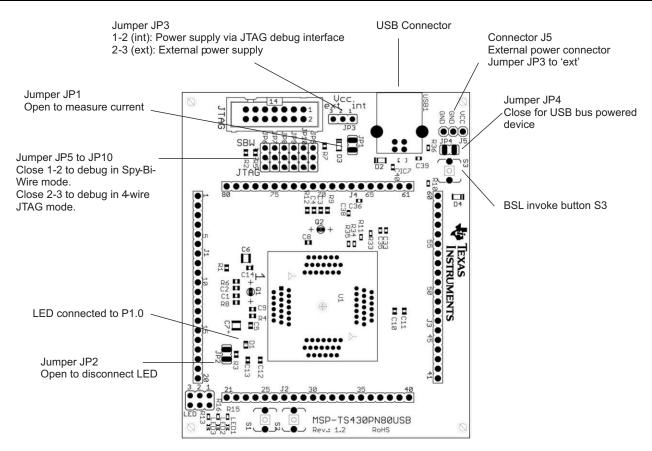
MSP-TS430PN80USB Target Socket Module, PCB
